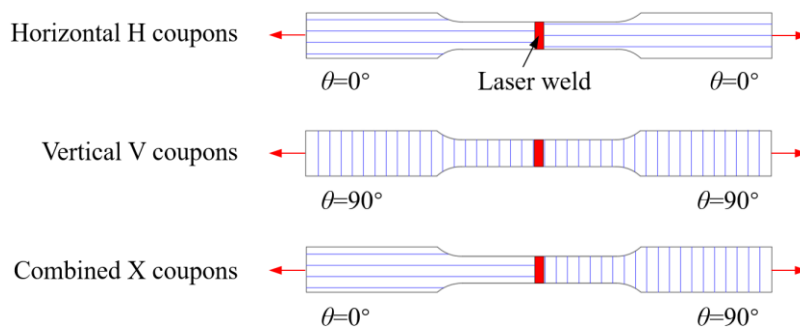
Welded tensile coupon families, showing the print layer direction of the half parts
